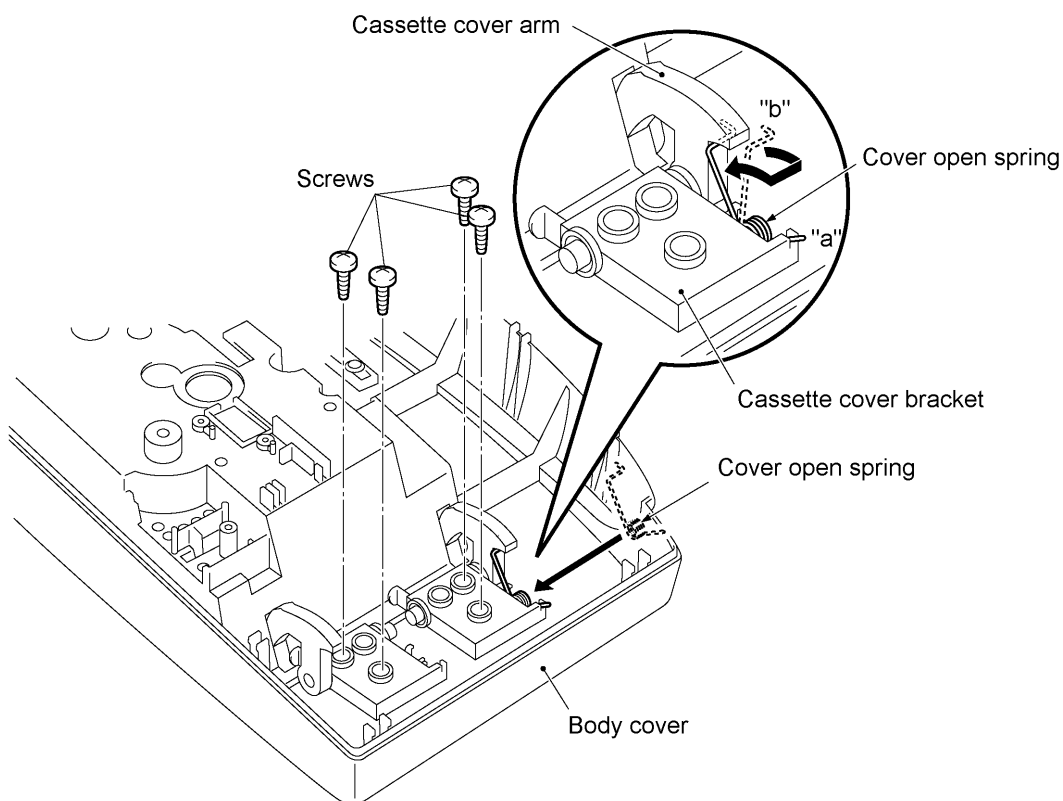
Setting the Cover Open Spring and Securing the Cassette Cover Brackets
